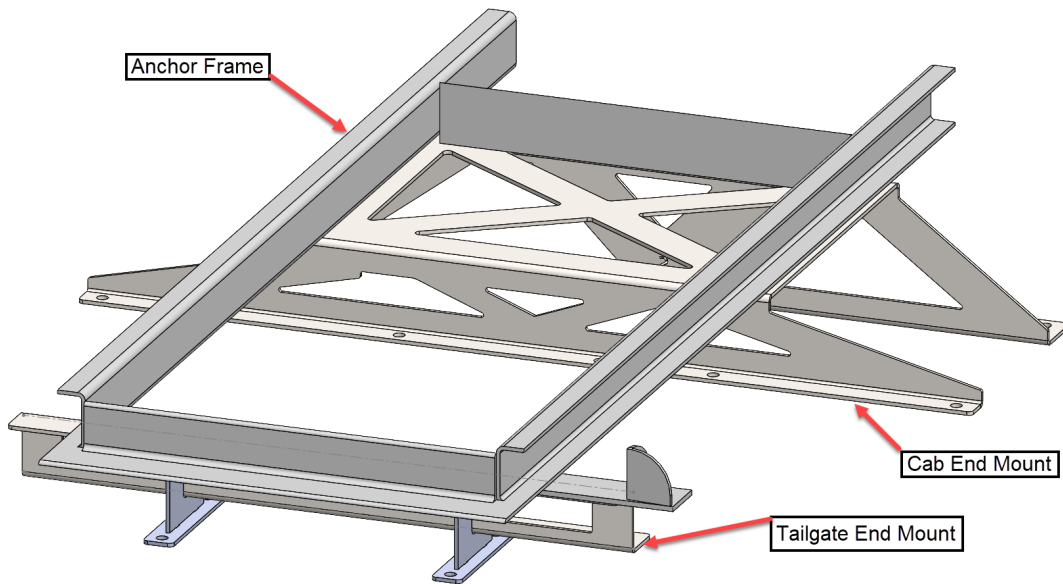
GM EBL Anchor Frame with Mount Brackets.
